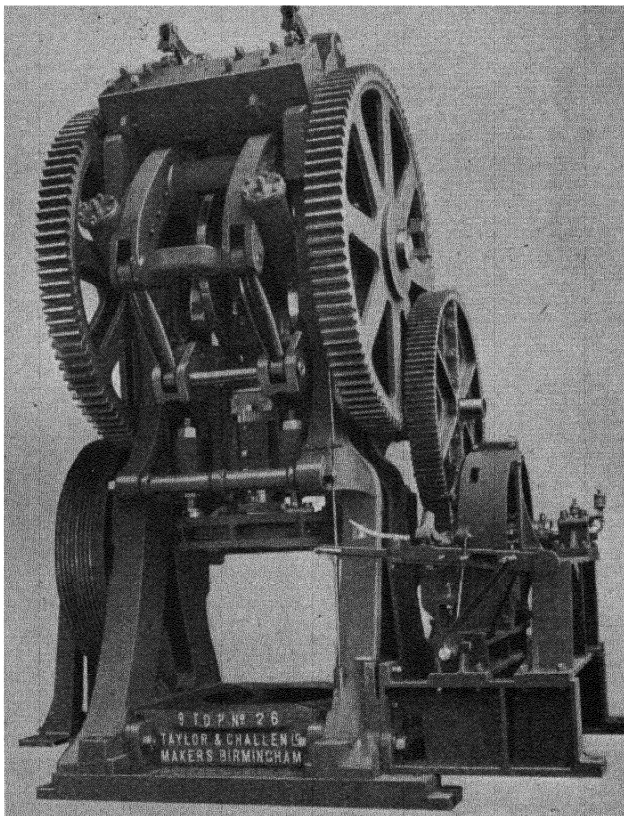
HEAVY-DUTY DOUBLE-CRANK TOGGLE DRAWING PRESS
